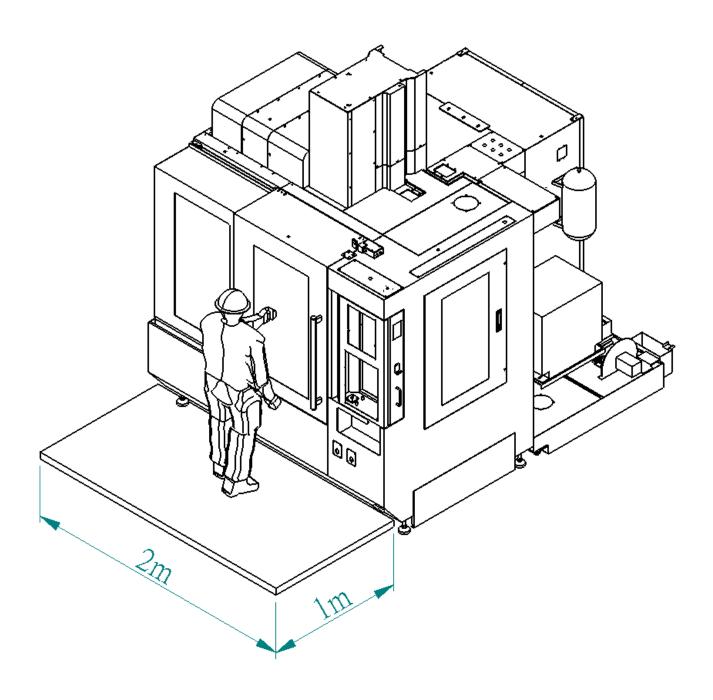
OPERATOR POSITION VIEW OF MACHINE
